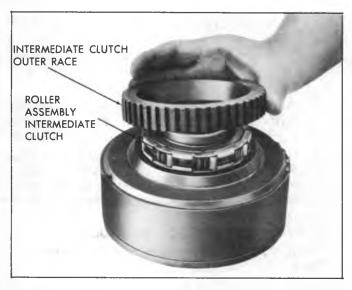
TA--Installing Intermediate Clutch Outer Race to Direct Clutch
